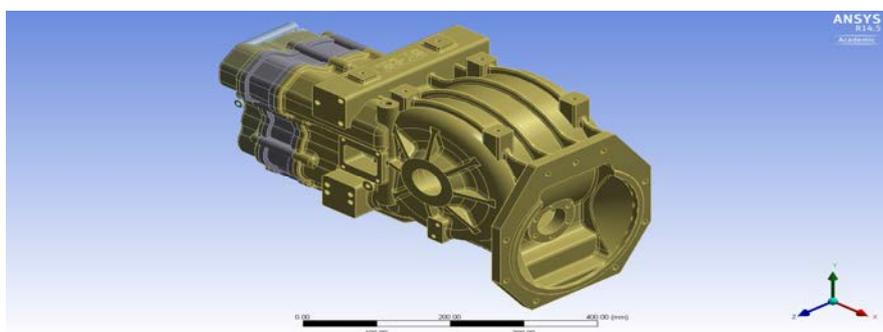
Heavy vehicle medium duty truck transmission gearbox housing
